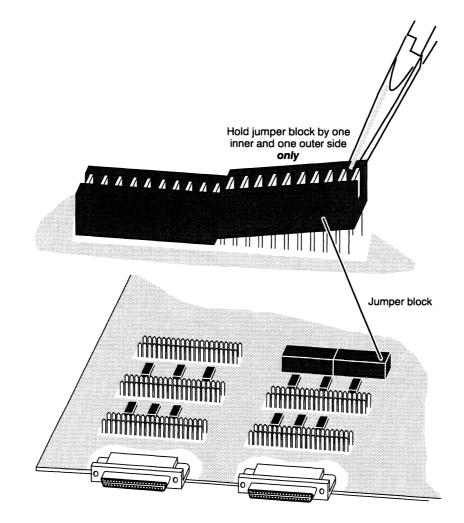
Removing Electrical Interface Selection Jumper Blocks
